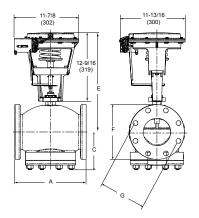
MK-6811 with Flanged 2-Way Globe Valves
